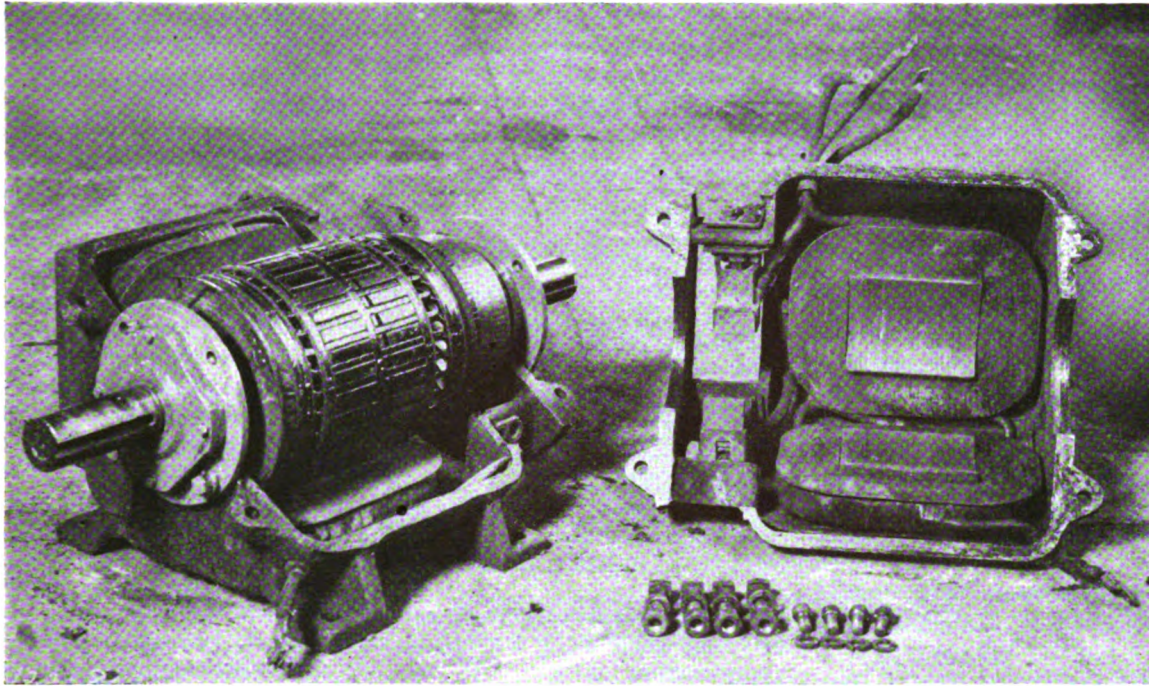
One of the crane motors rebuilt for ball bearings. Bearing housings that could be attached to the frame by machining were designed for each size of motor.
